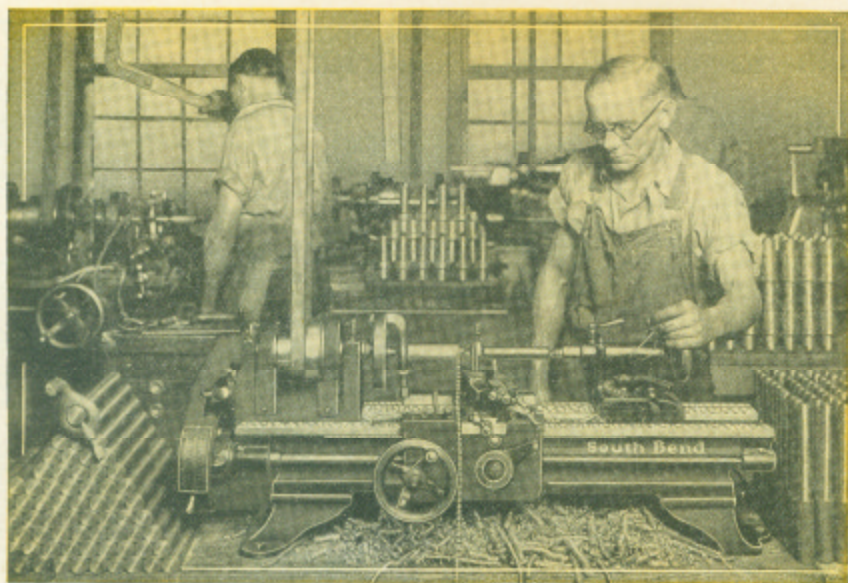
The Motor Drive Unit is located on a table directly above the lathe headstock. The driving cone receives its power from the motor through the Silent Chain which eliminates vibration and noise. The spindle cone is driven by belt.
